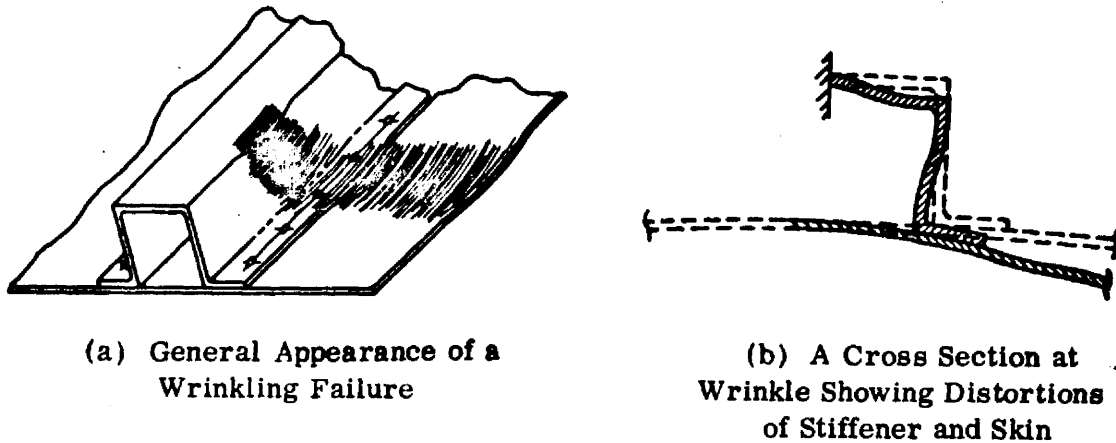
TYPICAL PANEL WRINKLING FAILURE.
